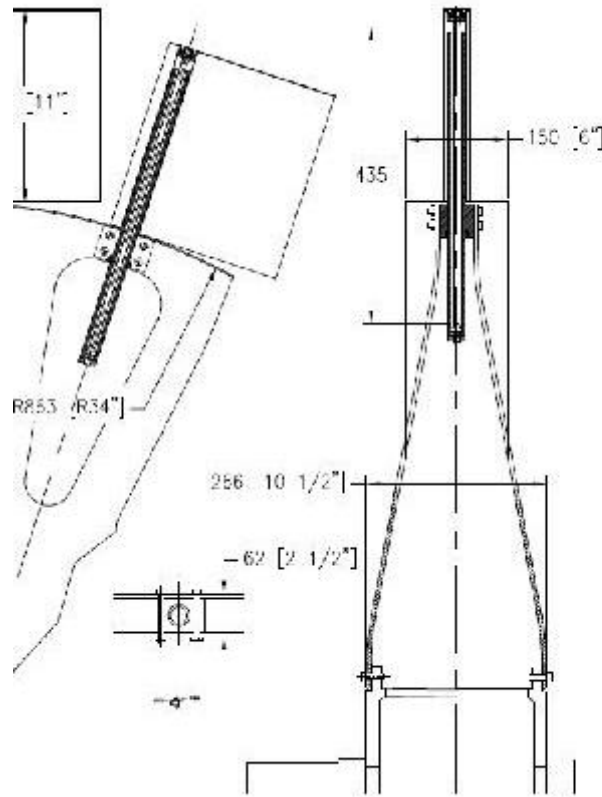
Illustration of self-actuated blade articulation system installed into Wells Rotor using steel stampings instead of castings to reduce cost
